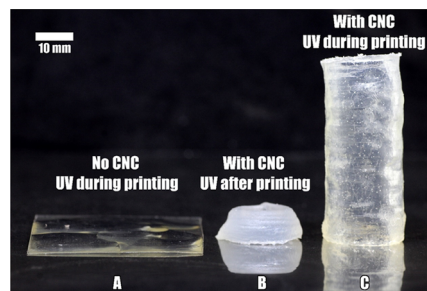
DIW-printed 20 mm diameter tube objects. (A) Tube object failed to be printed with 0% CNC and UV-cured during printing. (B) Tube object failed to be printed with 2.4% CNC and UV-cured after printing; the object is composed of 14 printed layers. (C) Tube object successfully printed with 2.4% CNC and UV-cured during printing. The object contains 32 printed layers.
